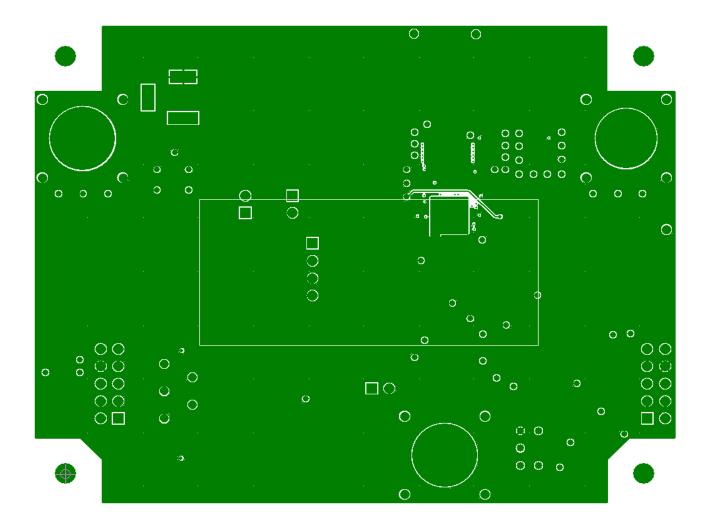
PCB - INNER LAYER 1 (VIEWED FROM TOP)
